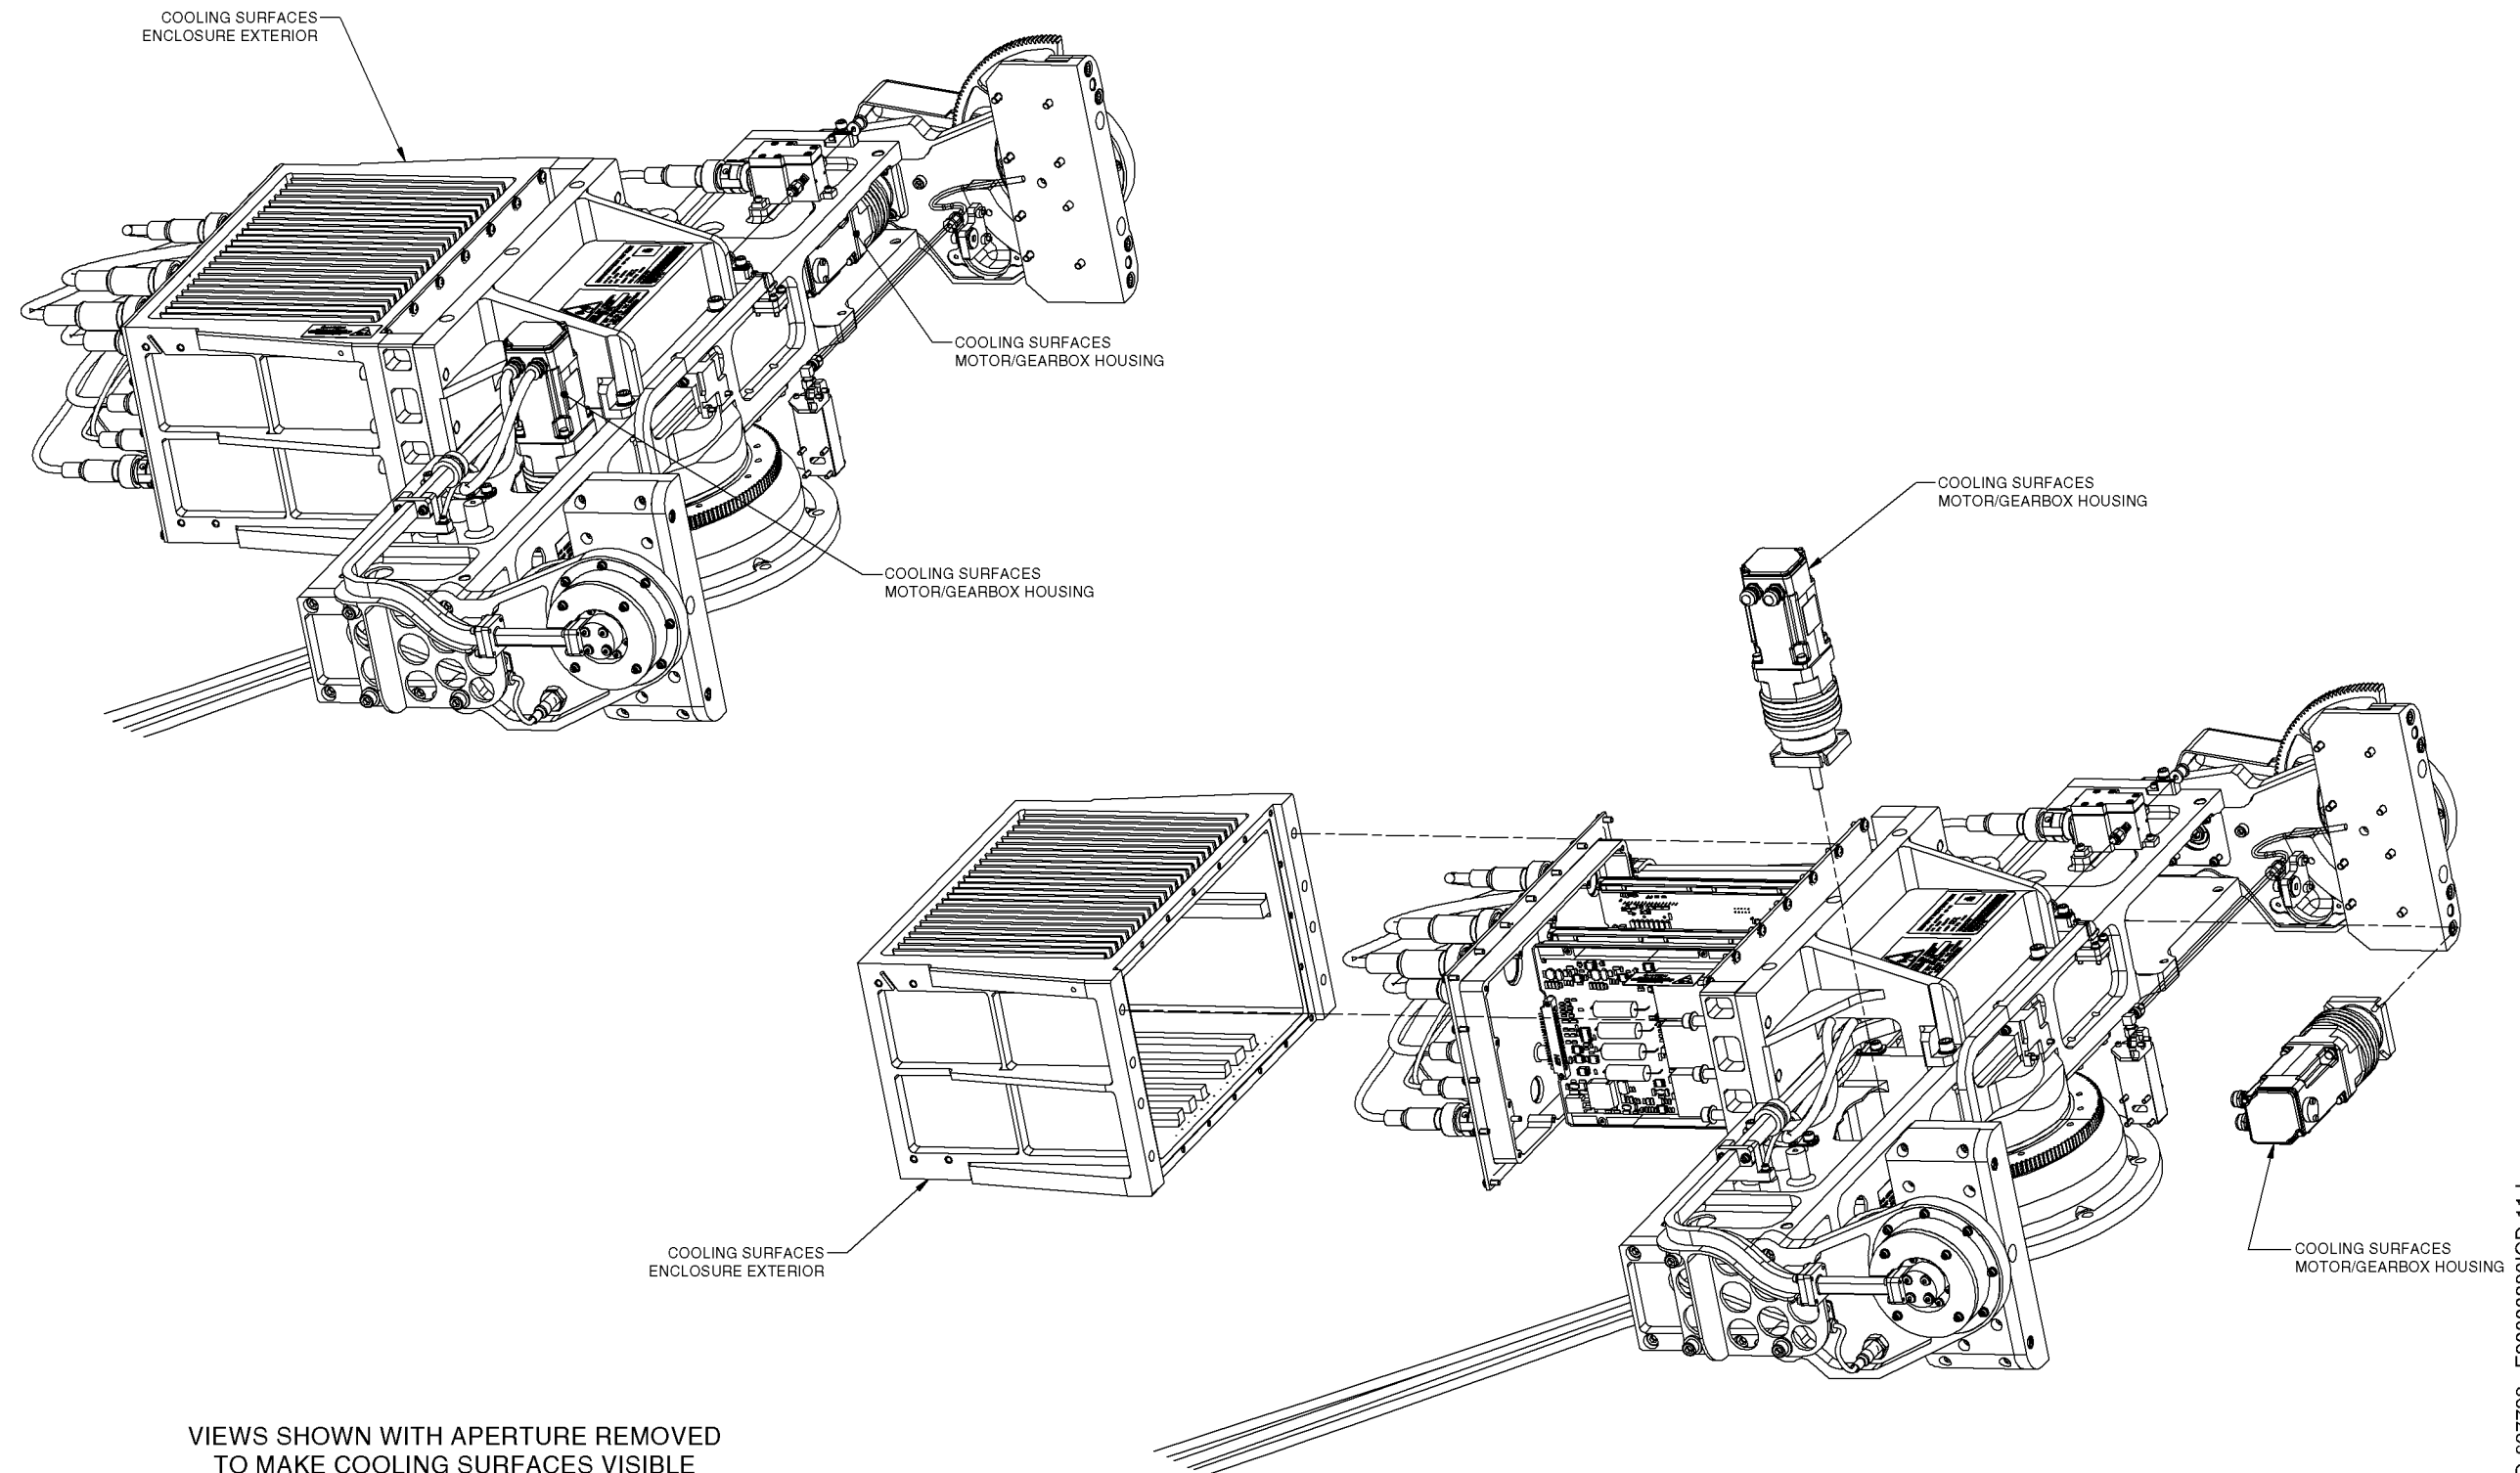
(Sheet 11 of 14) FMA Outline and Installation Drawing (90000380ICD, REV L)
